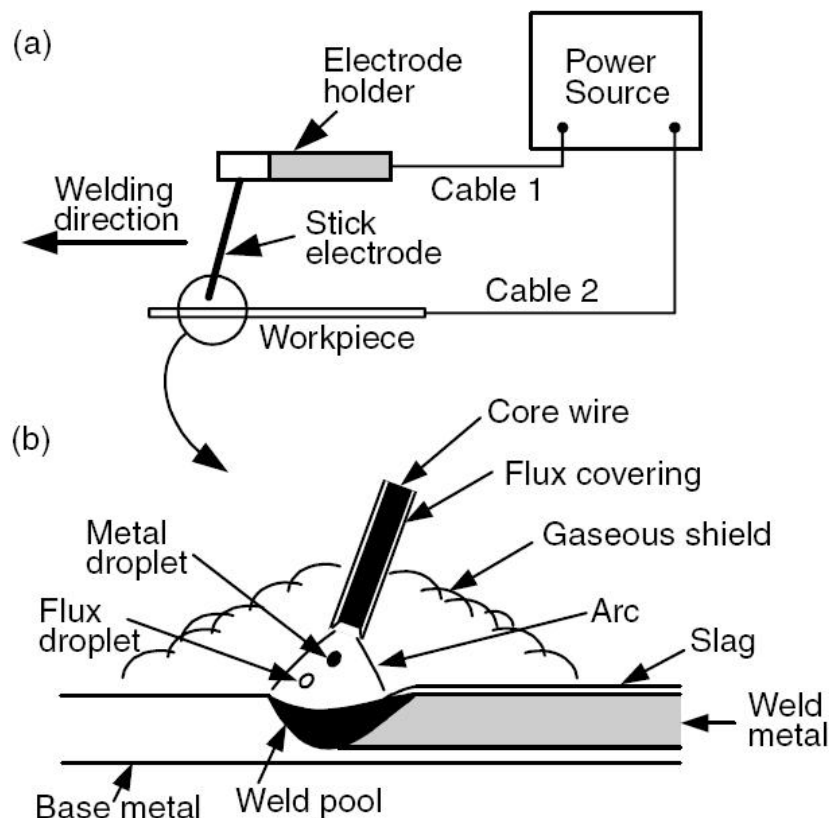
Shielded Metal Arc Welding Process a) Overall Process and b) Welding area [6]
